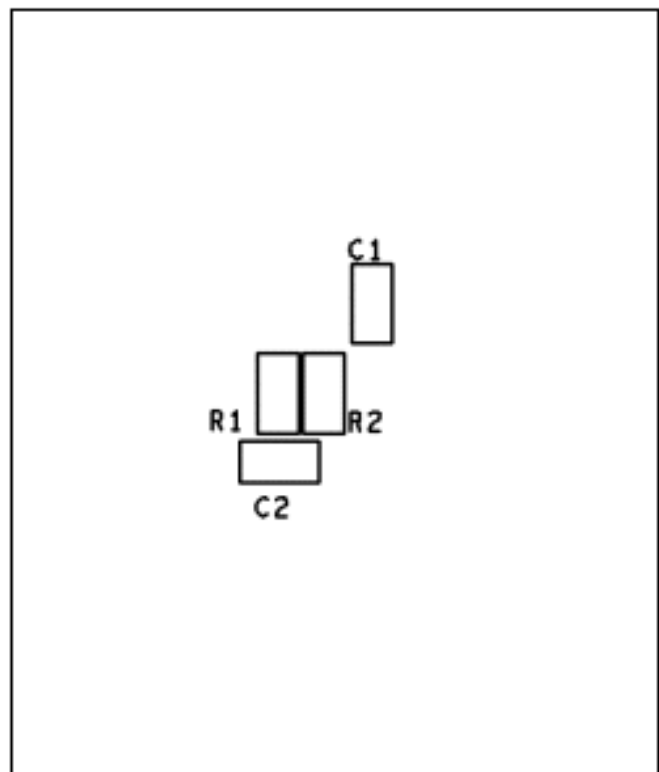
E1x1 75Ω impedance -- Silkscreen bottom layer layout (view mirrored)
